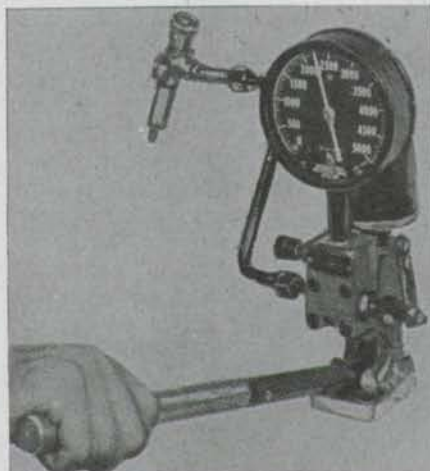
A.—To completely test and adjust an injector nozzle requires the use of a special tester.
